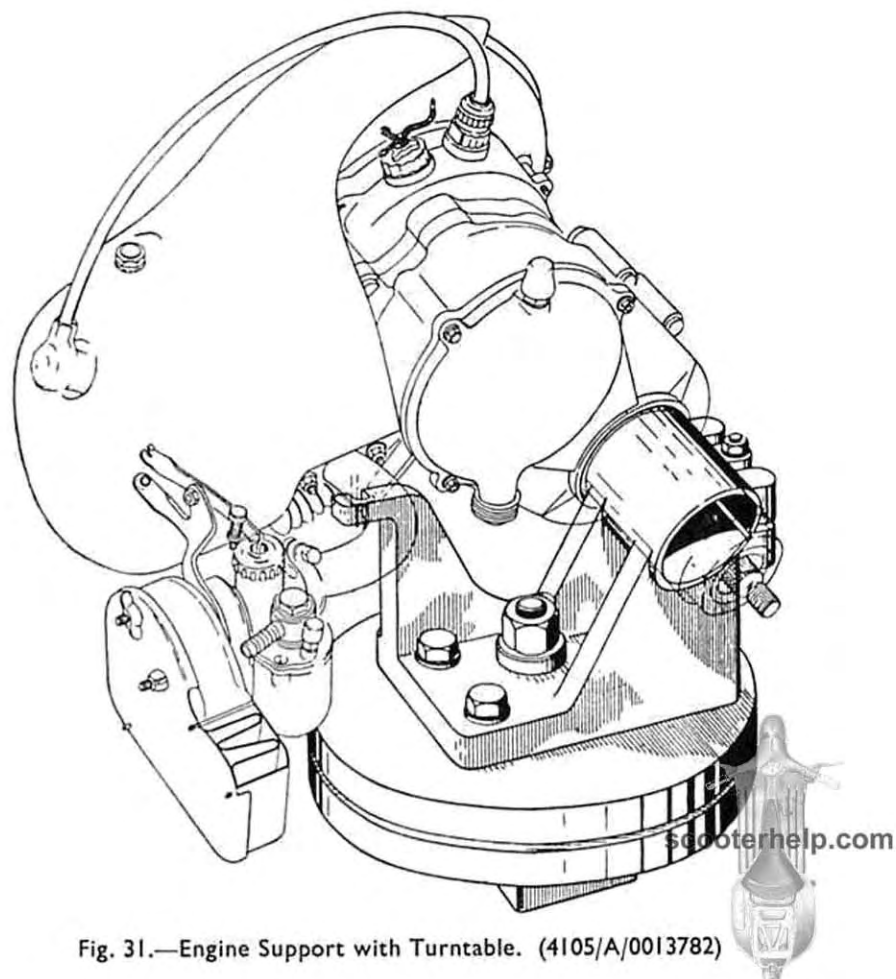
Engine Support with Turntable. (4105/A/0013782)
